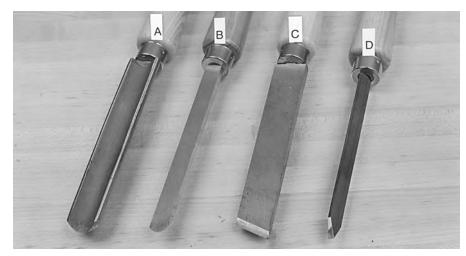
There are four basic types of lathe tools: (A) the gouge, (B) the roundnose chisel, (C) the skew chisel, and (D) the parting tool.
